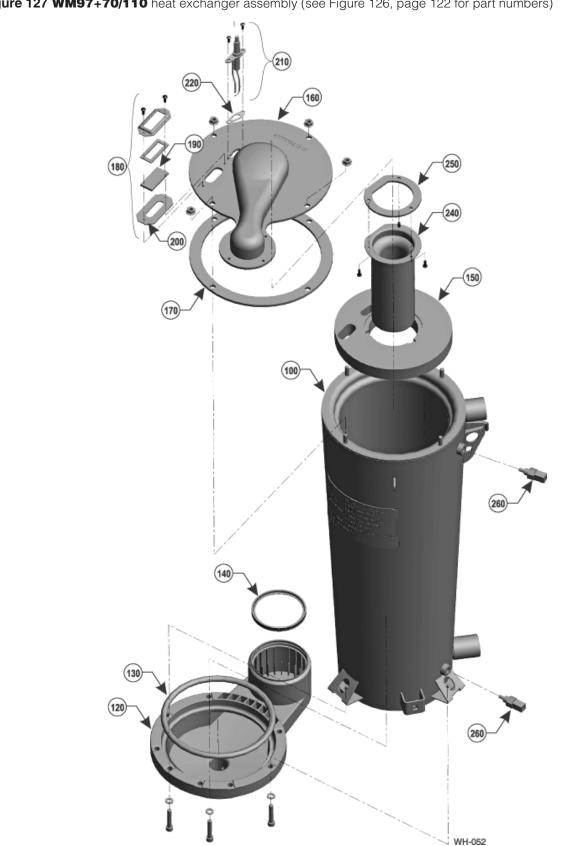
WM97+70/110 heat exchanger assembly (see Figure 126, page 122 for part numbers)
